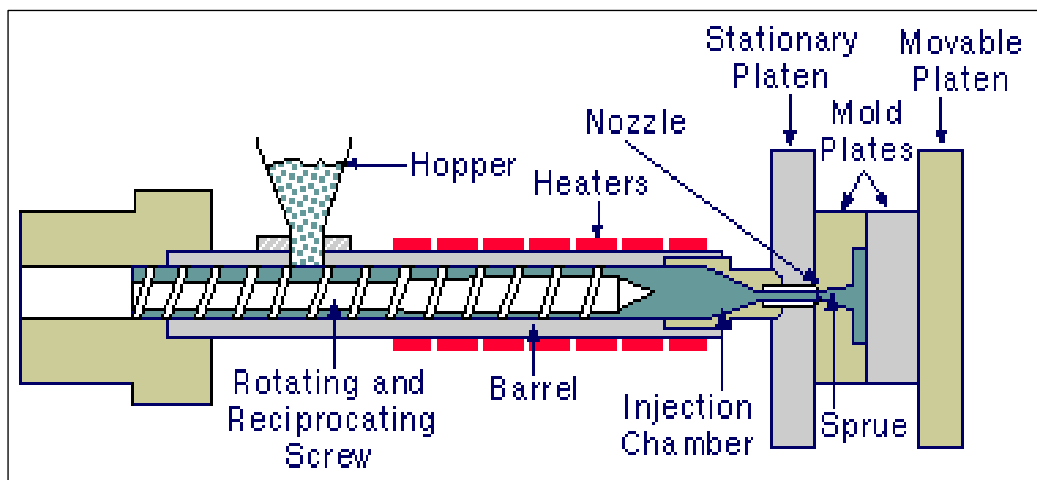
Single Stage Screw Machine (*dc.engr.scu*)
